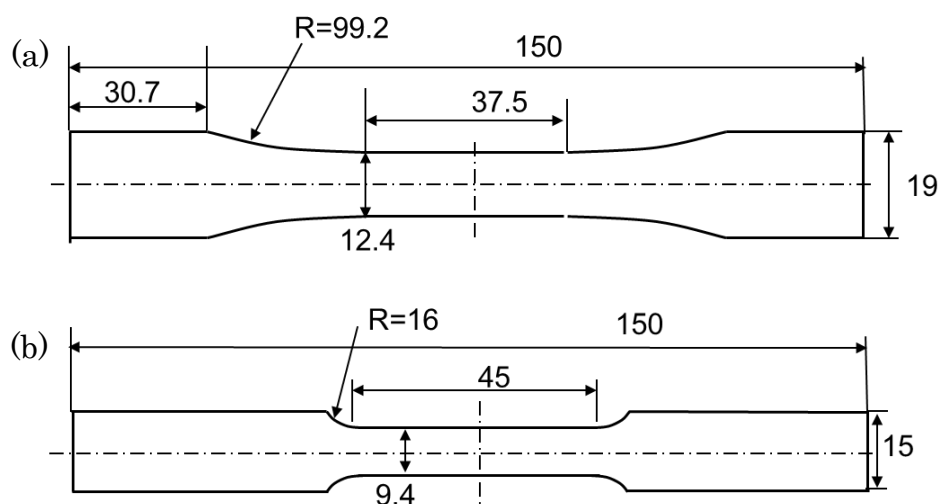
Specimen geometry used for fatigue tests (a) As weld and both surface grinding, (b) Top surface polished and both surface polished
